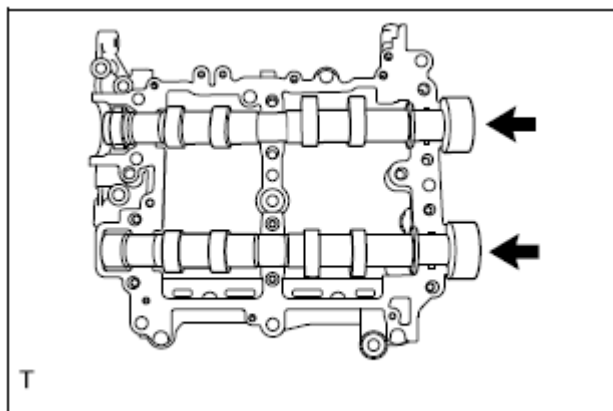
Identifying Intake And Exhaust Camshaft RH (Bank 1 Side)
